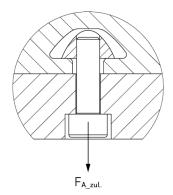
Mounting with T nuts - HT100L, HT150L
